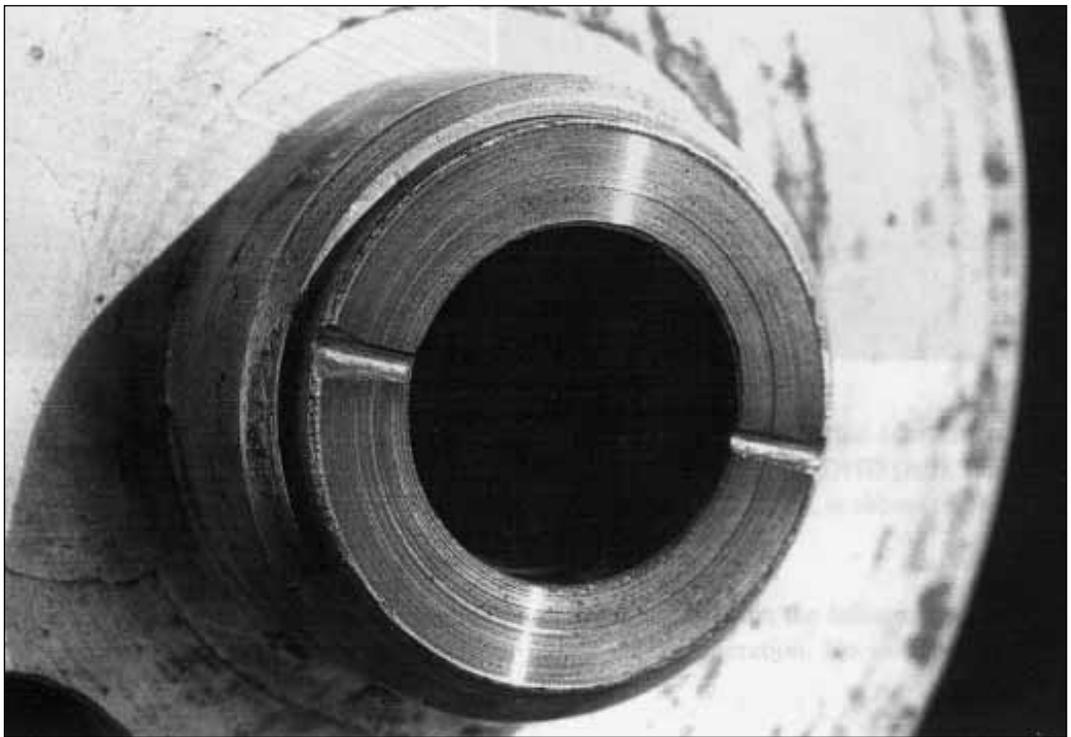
The thrust face of the bush fitted to the FCU fuel pump, left-hand engine.
